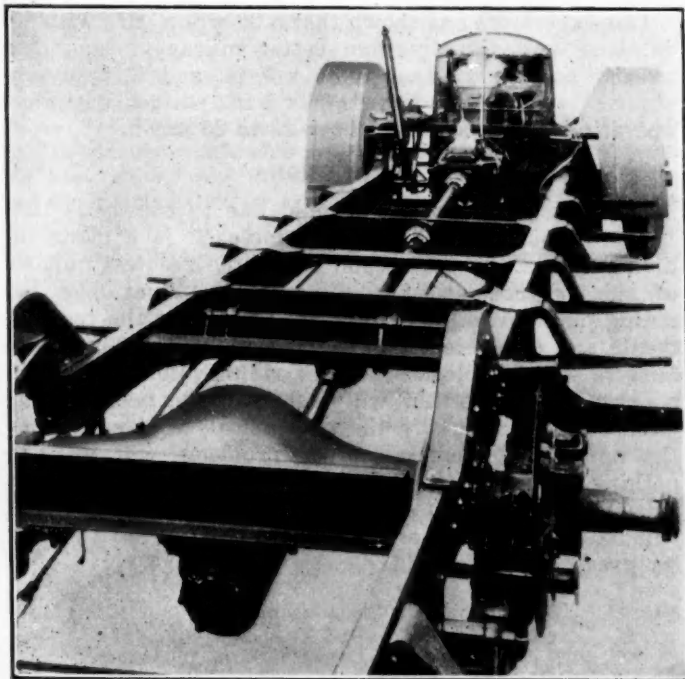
SAFETY-COACH CHASSIS ASSEMBLY
